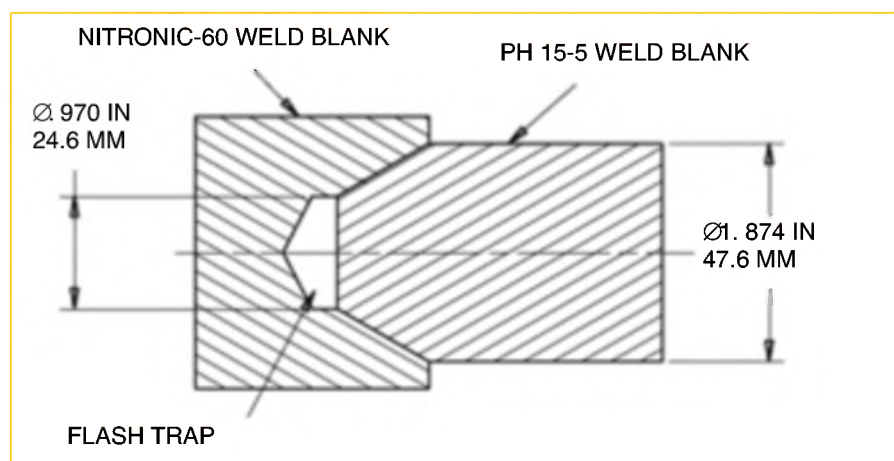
Inertia weld blank configuration implemented for the present study.
